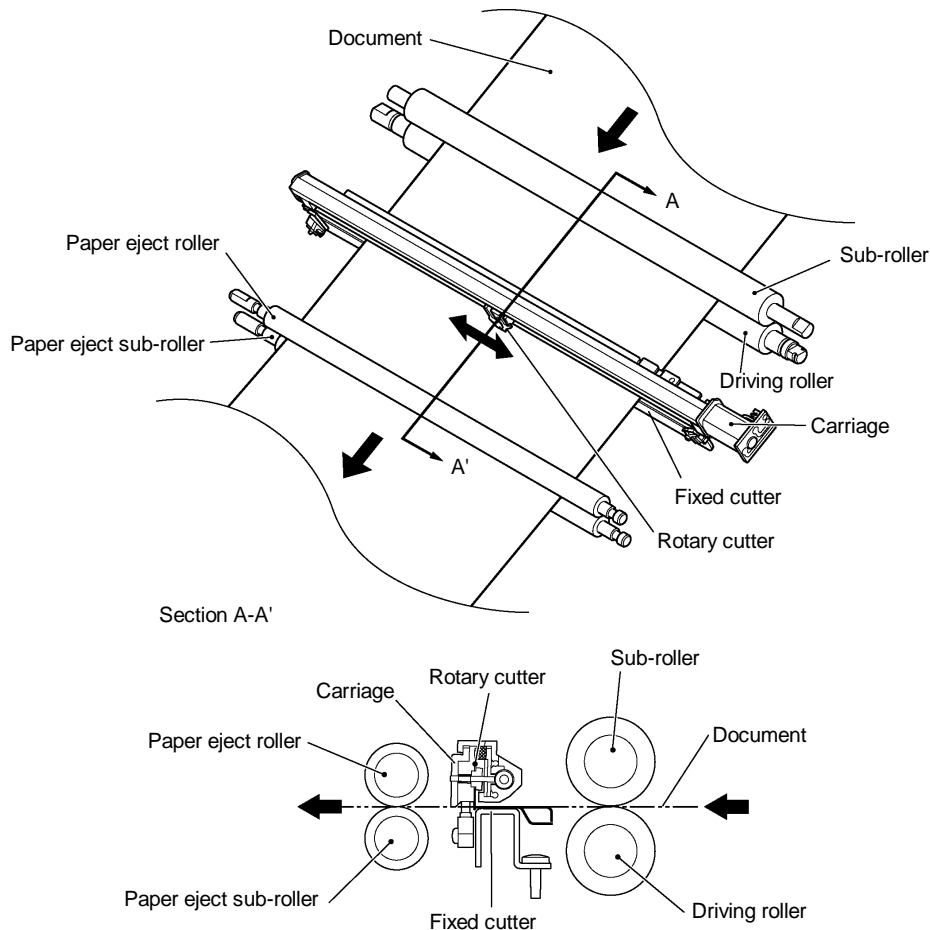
Cutting Leading and Trailing Edges (X-cutter Mechanism)
